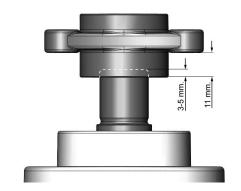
Make sure to fit the hub with the longer sleeve (11 mm) towards the gear housing.
